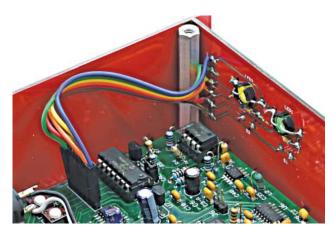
The front-panel pushbutton switches and LEDs are soldered to traces on the back side of the panel and connected to the PC board with a ribbon cable.
